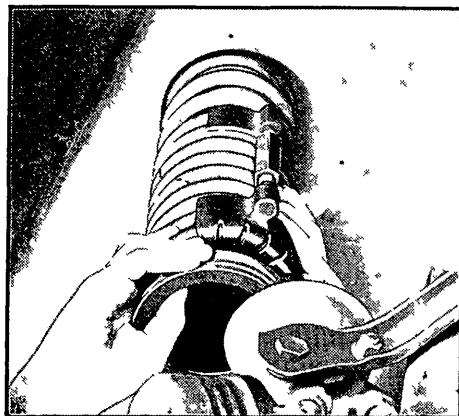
Removing front spring with special spring compressor. 1950-51 Rambler and All 1952
